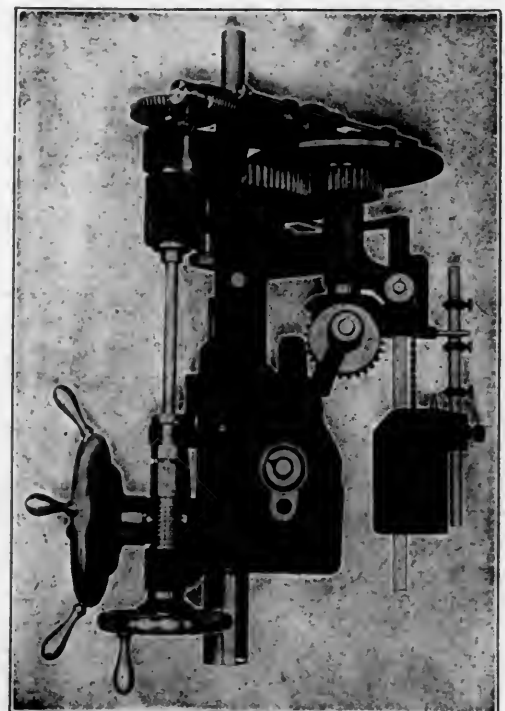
END VIEW OF HEAD UPON ARM, SHOWING FRICTION-PLATE FEEDING MECHANISM.
